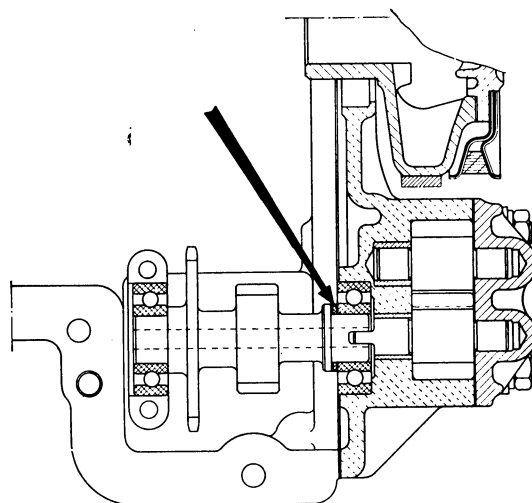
Sectional view of 118 B.000 engine oil pump.
